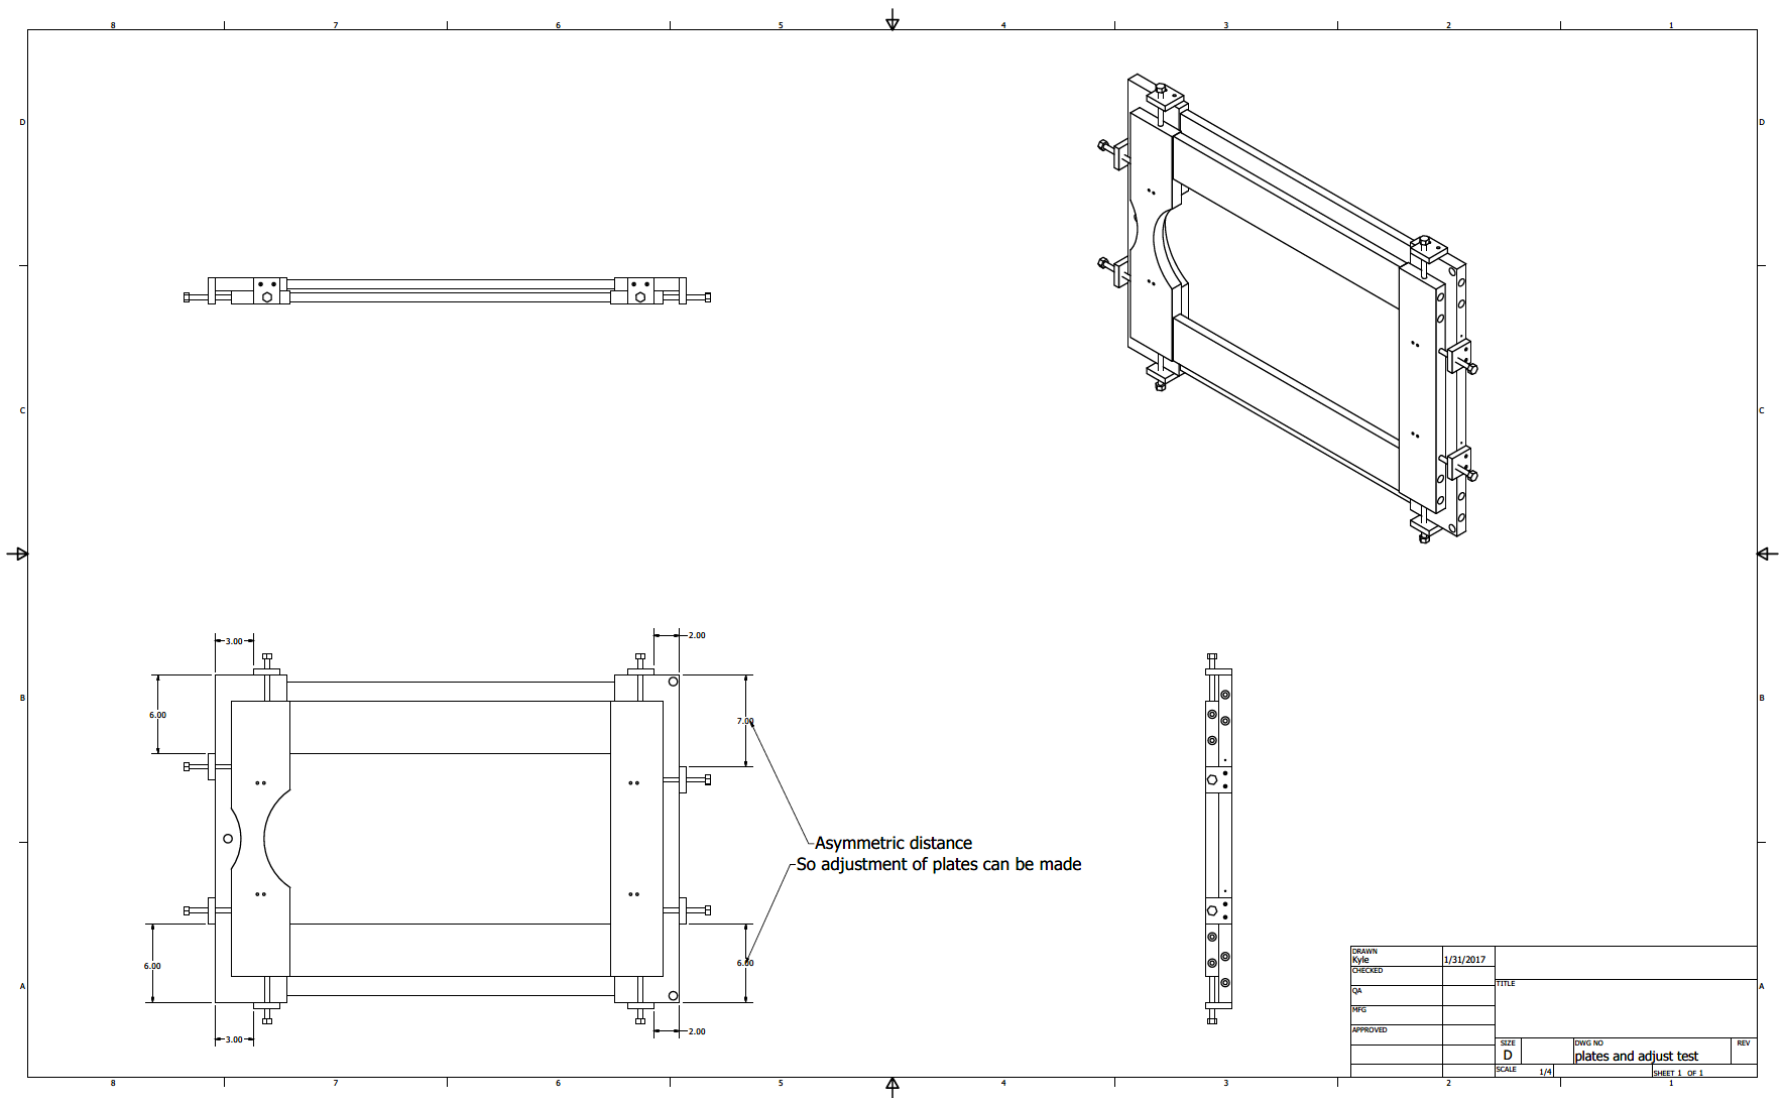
Drawing of adjustable plate assembly for relative dimensions.
